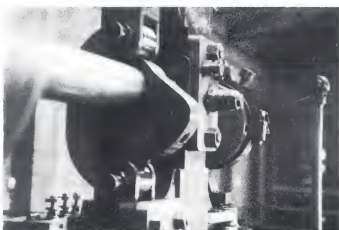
The exhaust valve gear for the high pressure cylinder of Number 8. In this case the top valve is open and the bottom valve is shut. As the two valves are mechanically linked, only one can open at a time. 1/15 sec on 400 ASA.
